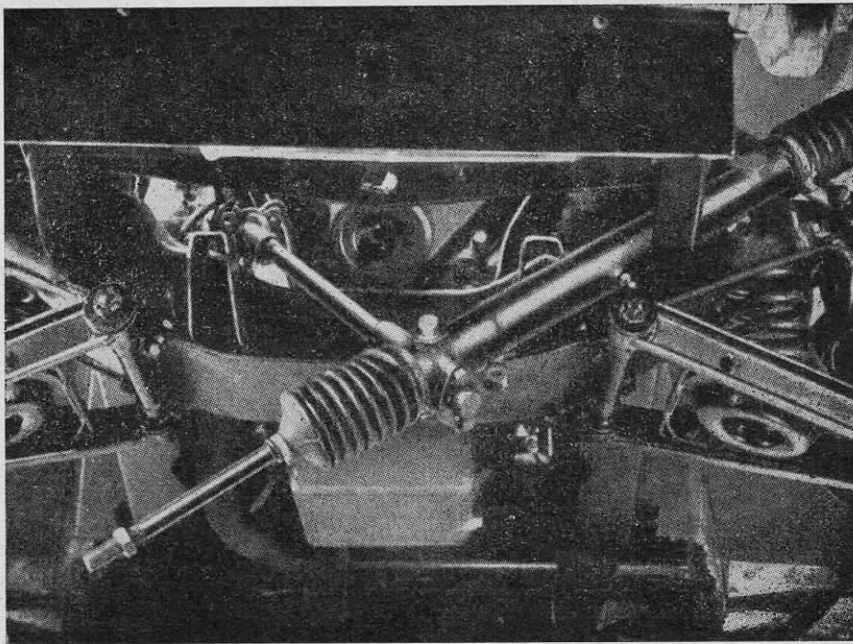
Showing the method of withdrawing the steering gearbox assembly from the front underside of the vehicle.
